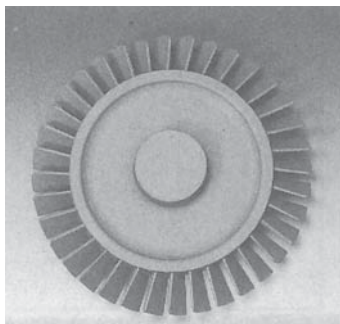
Ti alloy compressor disk with blades, made by superplastic forging of compacted alloy powder (diameter: 400mm)
